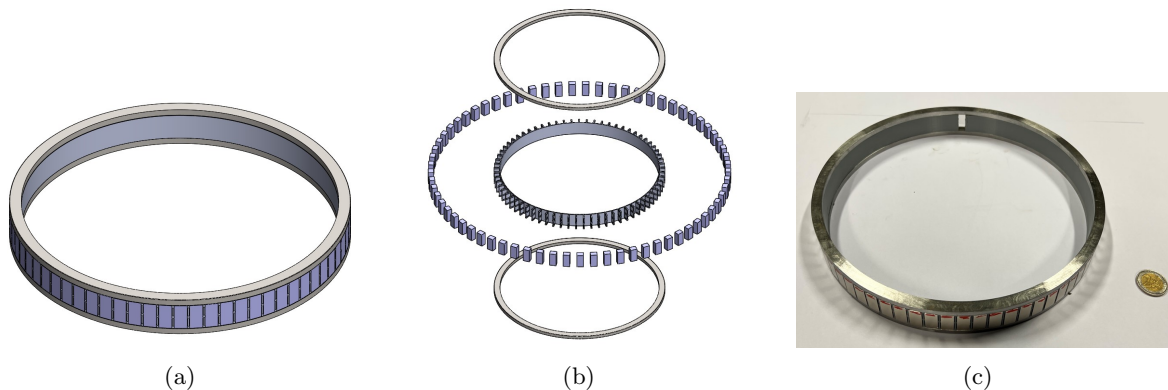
Stator of the magnetic bearing subassembly: (a) assembled (b) splitted (c) real view.
